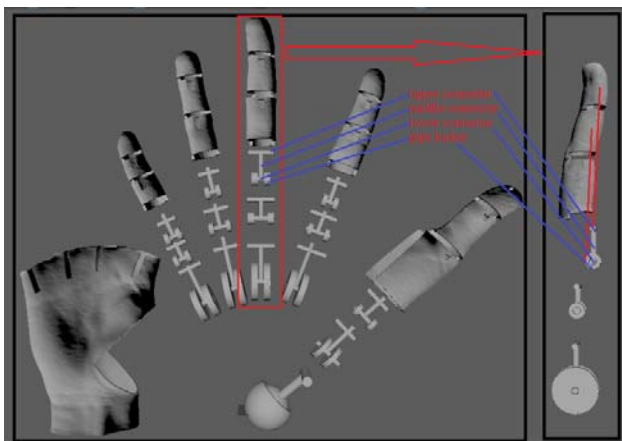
(left) Front view of inside structure of our robotic hand (right) Side view of middle finger
